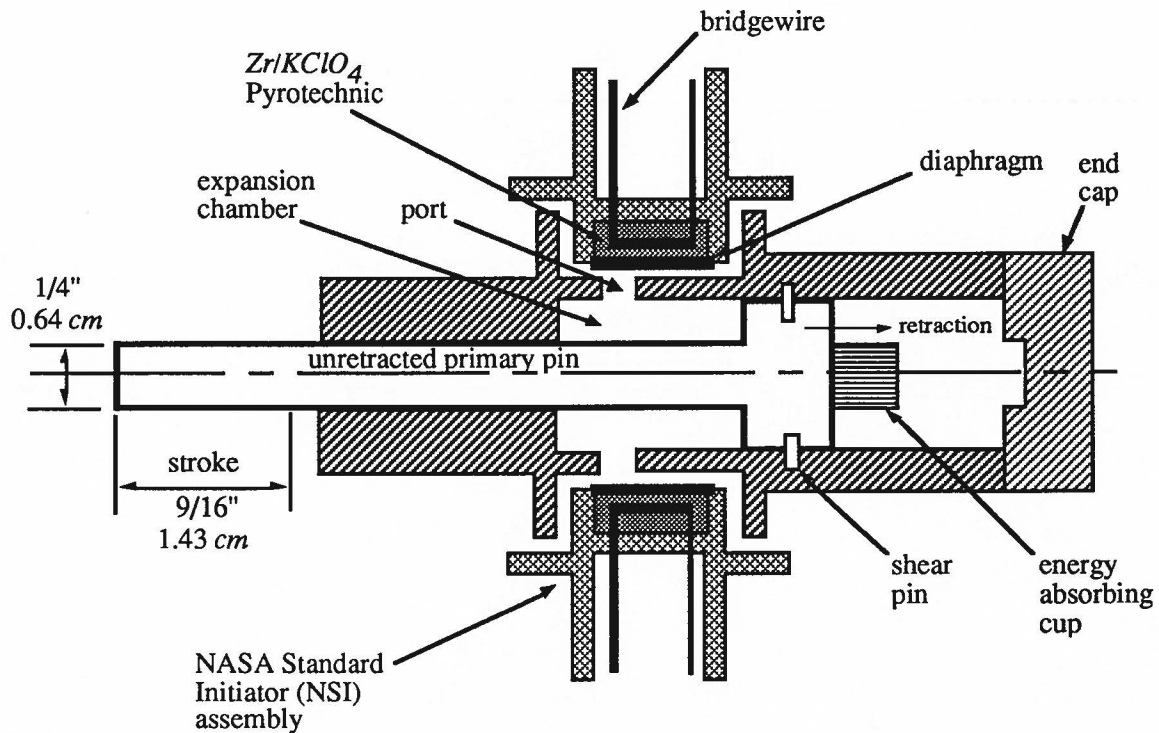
Cross-sectional view of pyrotechnically actuated pin puller.
